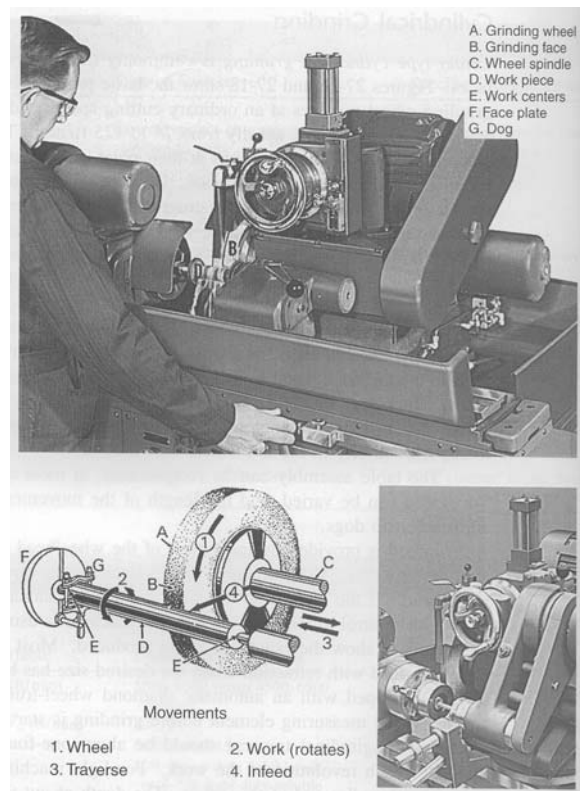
Cylindrical grinding between centers, lower right: Internal cylindrical grinding on same machine.
